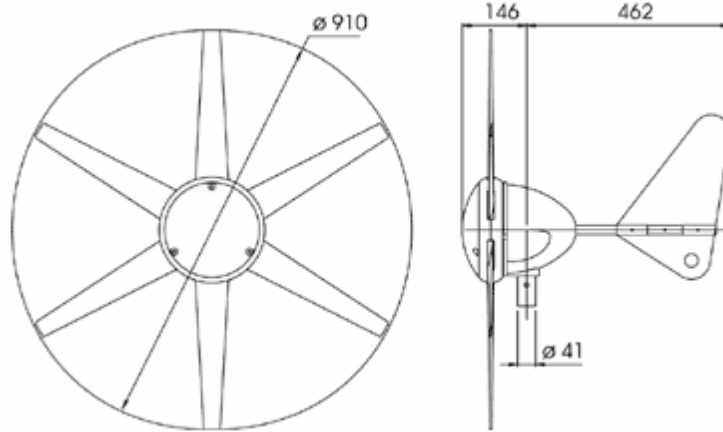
Rutland WG913 wind charger and dimensions [11]
